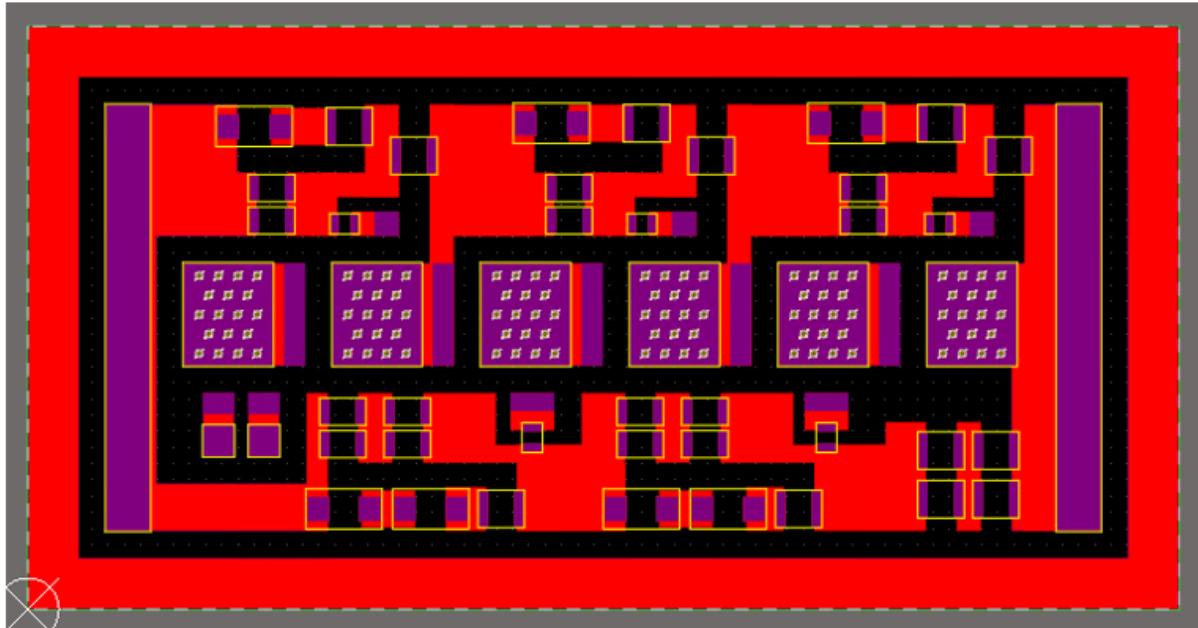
Top layer PCB design (Red: Copper masked, Purple: Exposed copper or Wire bondable area, Black: ERCD, Yellow: Solder Stops)
